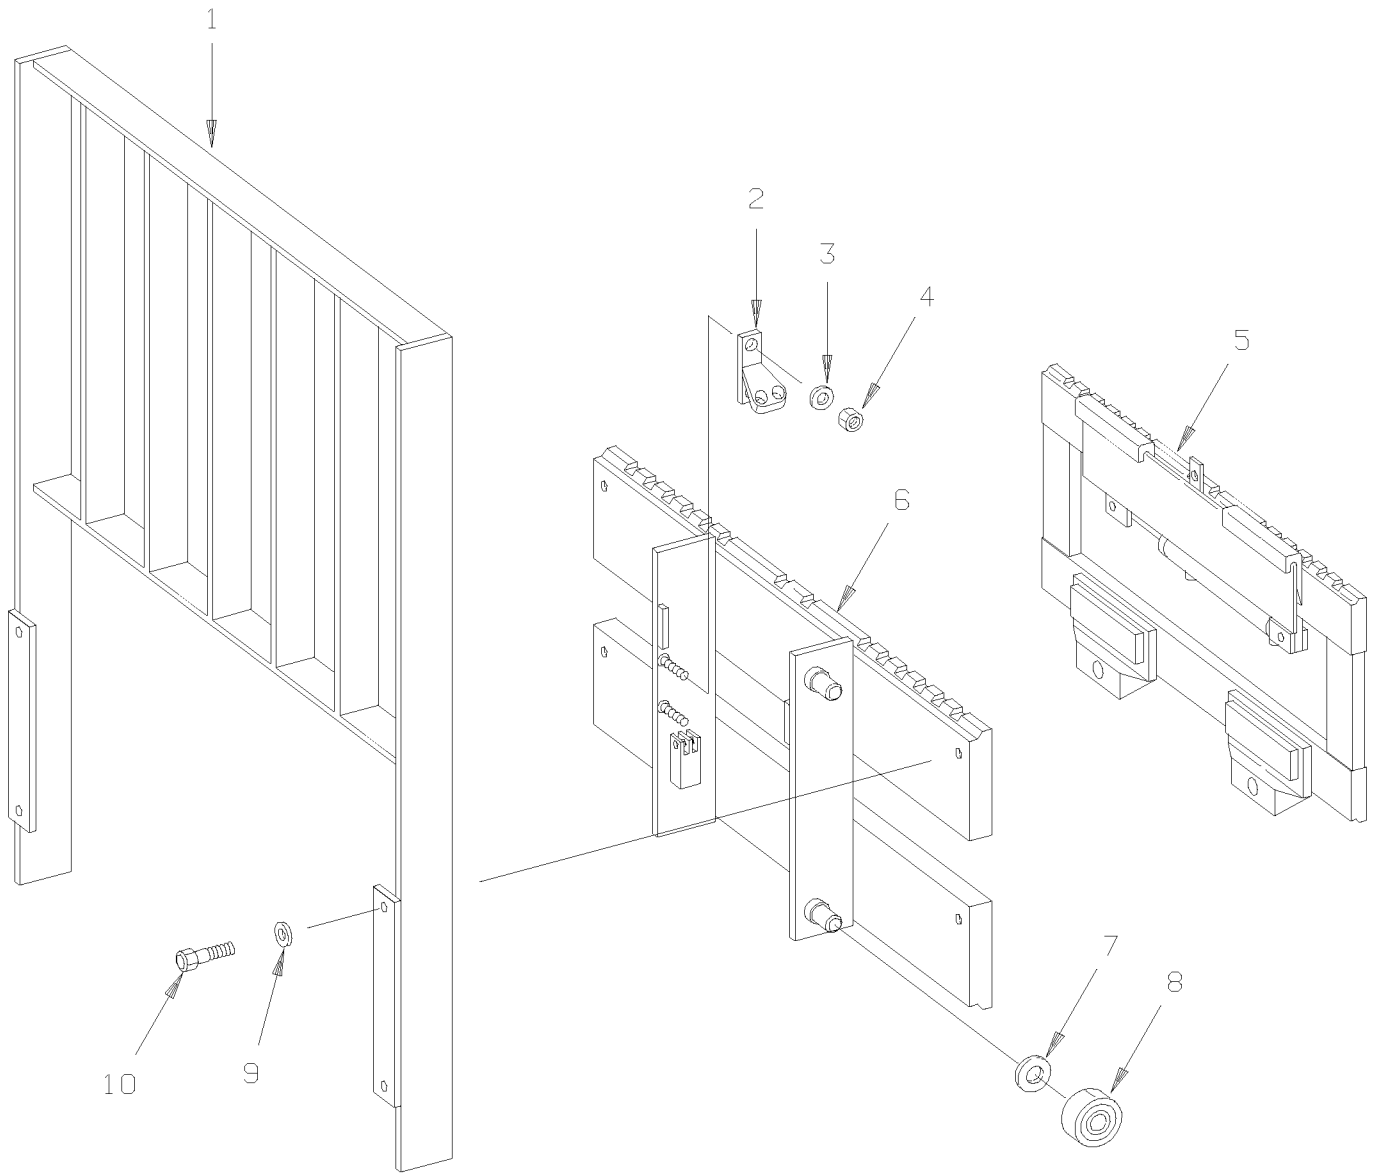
SC-30 TWO STAGE MAST INNER COLUMN ASSEMBLY
